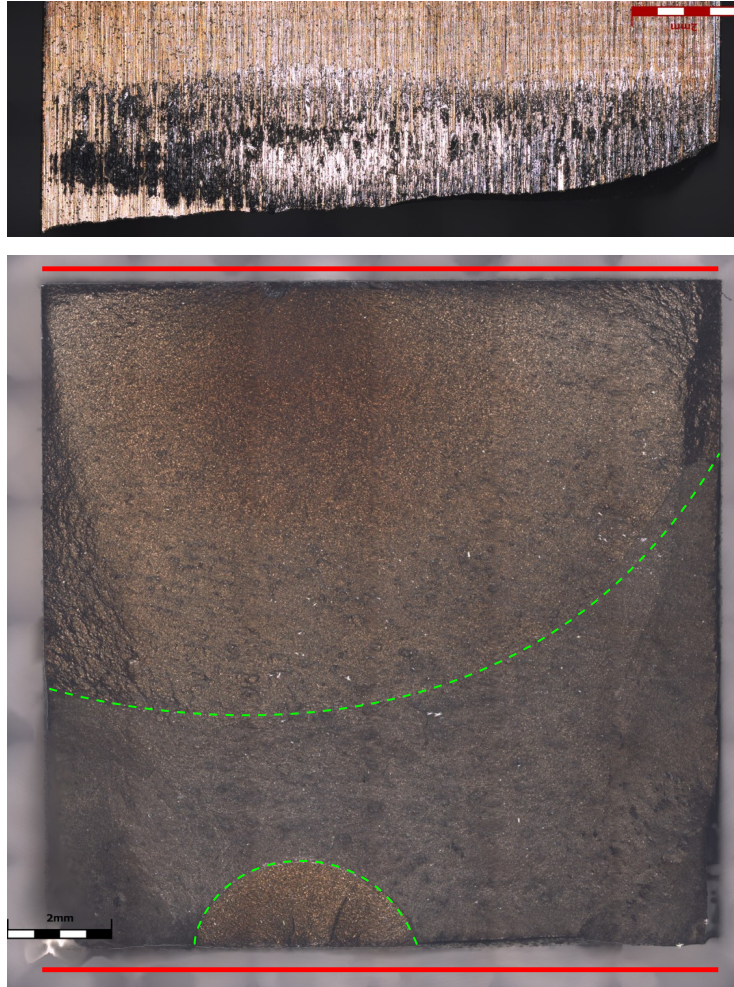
Fretting fatigue contact scar and fracture surface of a test for Inconel 718 at 540°C with cyclic contact normal load (ff-in-ht-pv-02).
